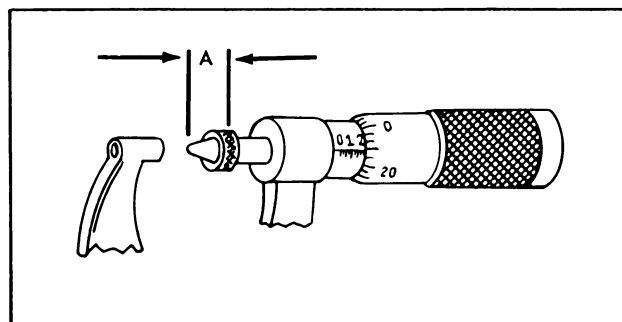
Modifying Hand Micrometer for Indent Inspection
